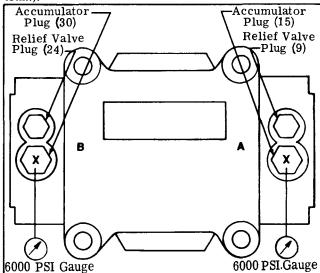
Pressure Gage Connections & Relief Valve Plugs (CMX250, 400 & 630 only).
